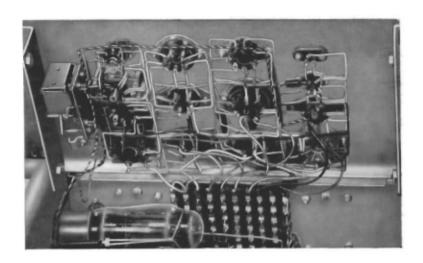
UNDERSIDE VIEW OF VALVEHOLDER PANEL
